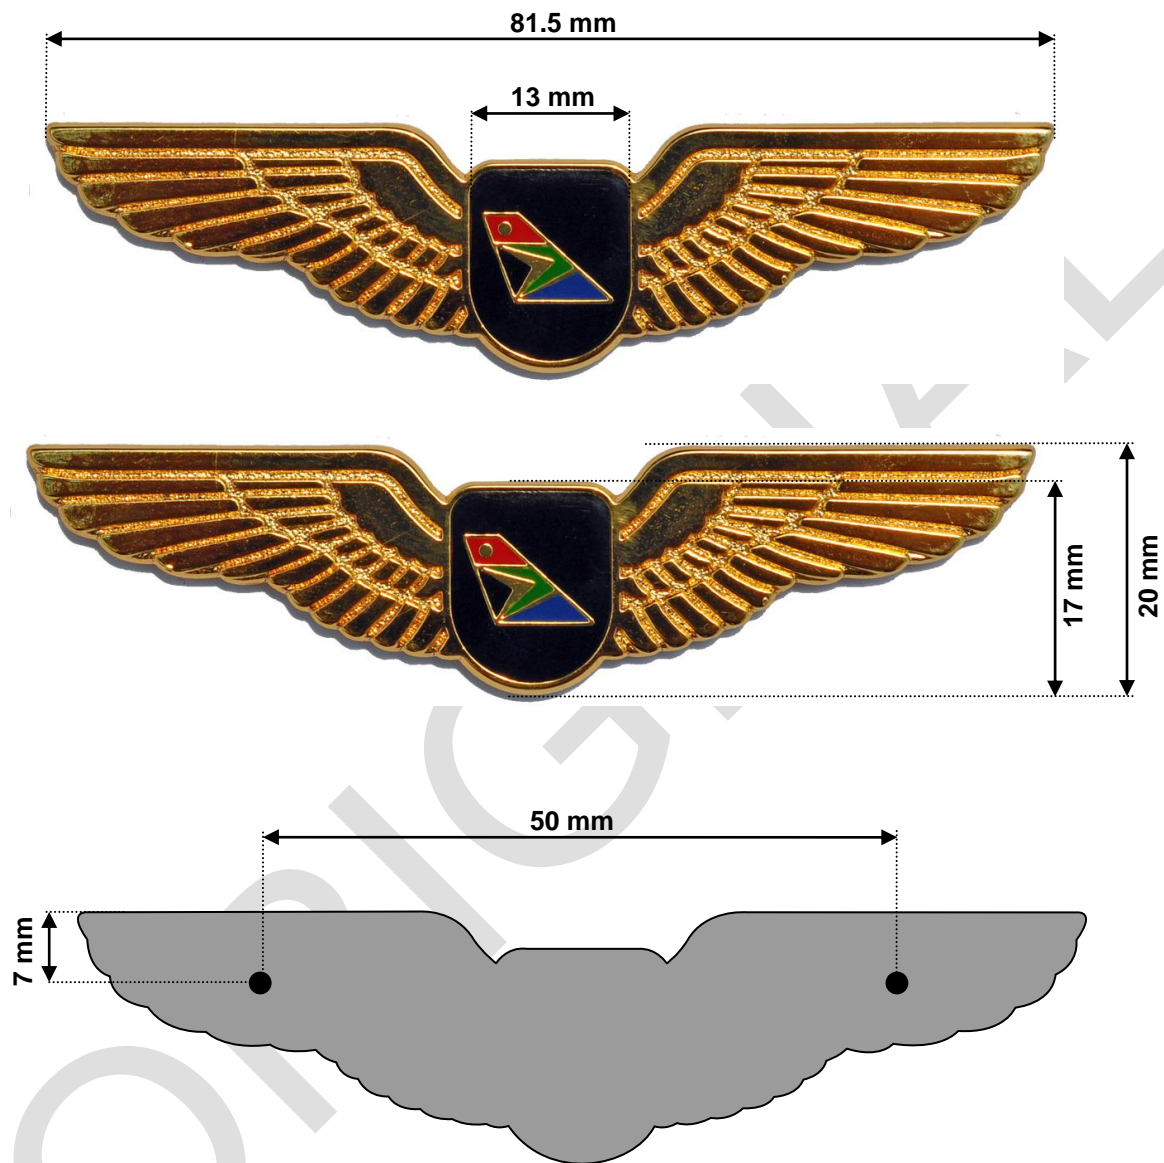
Dimensions of the Flight deck crew badge, Full wings
